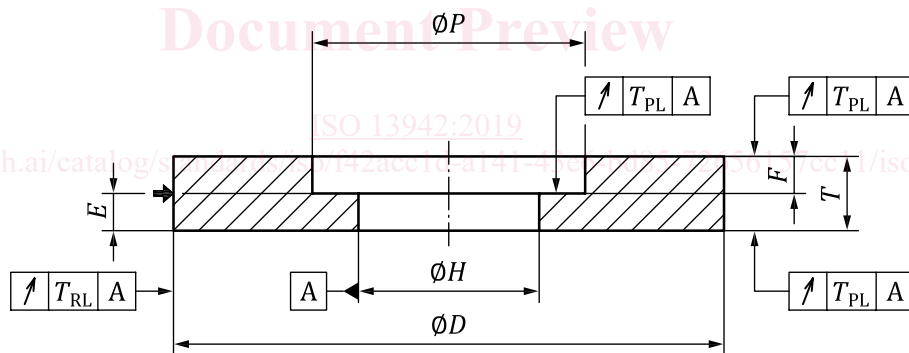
Grinding wheel, recessed on one side (Type 5)
